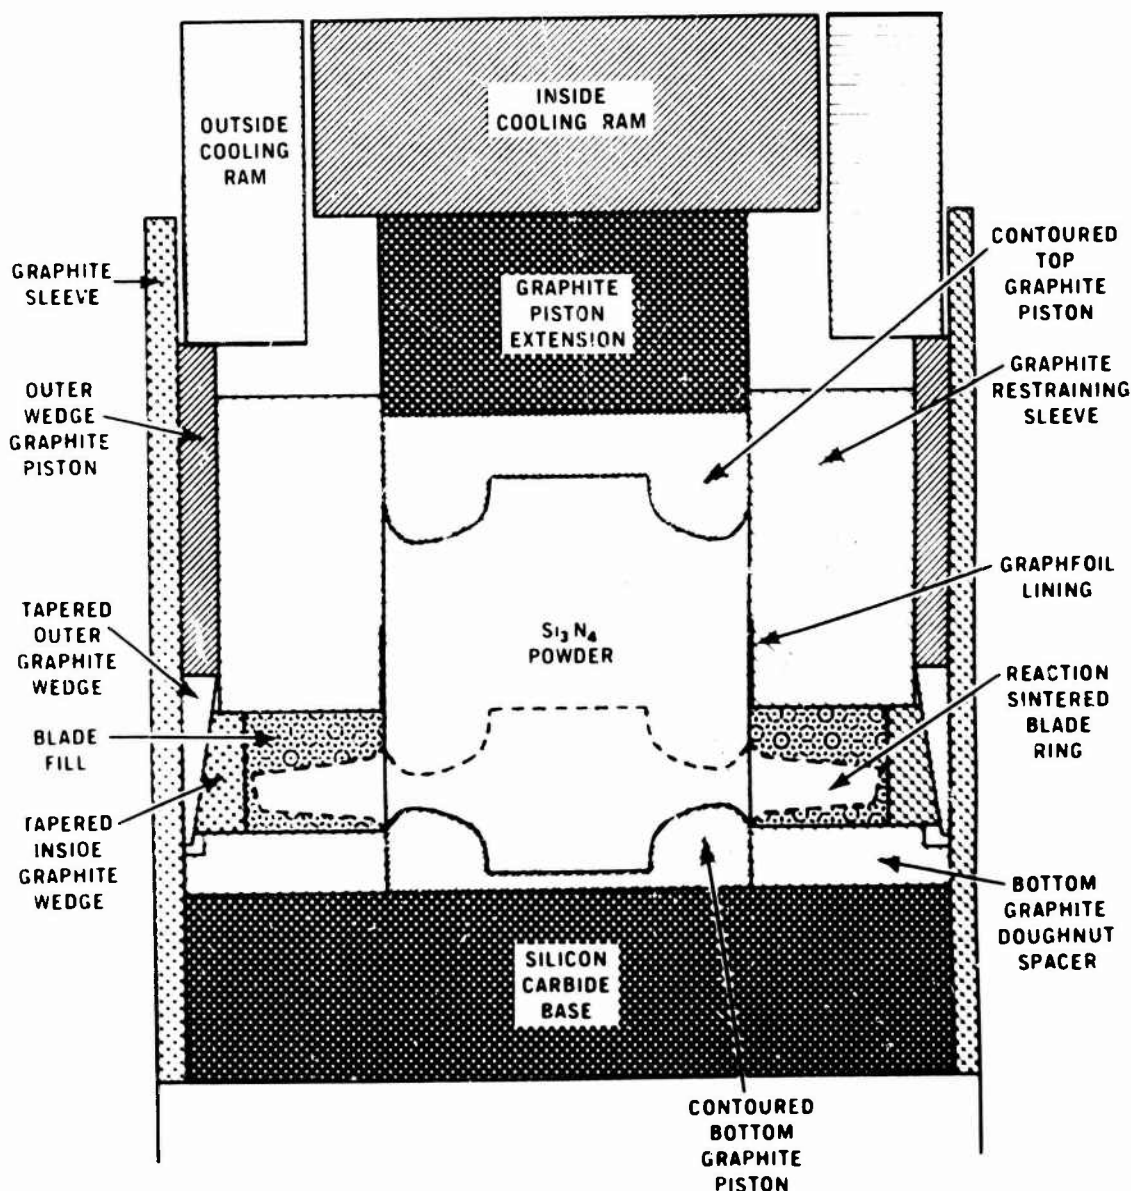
Hot Press Bonding Assembly for Simultaneous Forming and Bonding of a Silicon Nitride Rotor Hub to a Blade Ring
